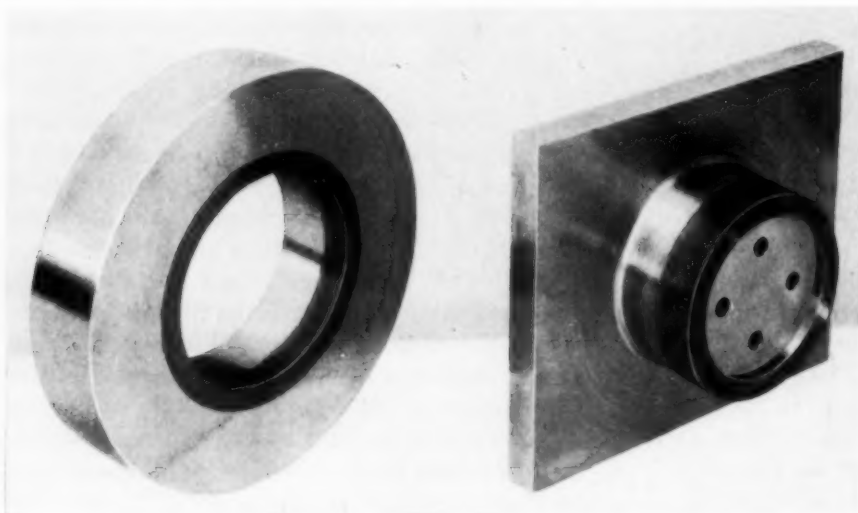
Sintered Carbide Inserts, Trade-Named "Diecarb", After Blanking a Half-Billion 0.025-In. Silicon Sheet Laminations, Averaging 50 to 60 Million Pieces per Grind
